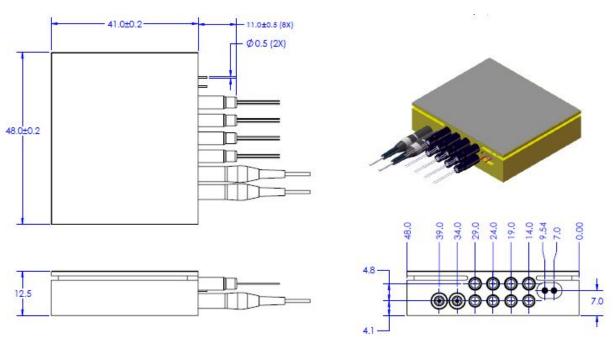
, Mechanical Drawing of the 2x8 Coherent Receiver
